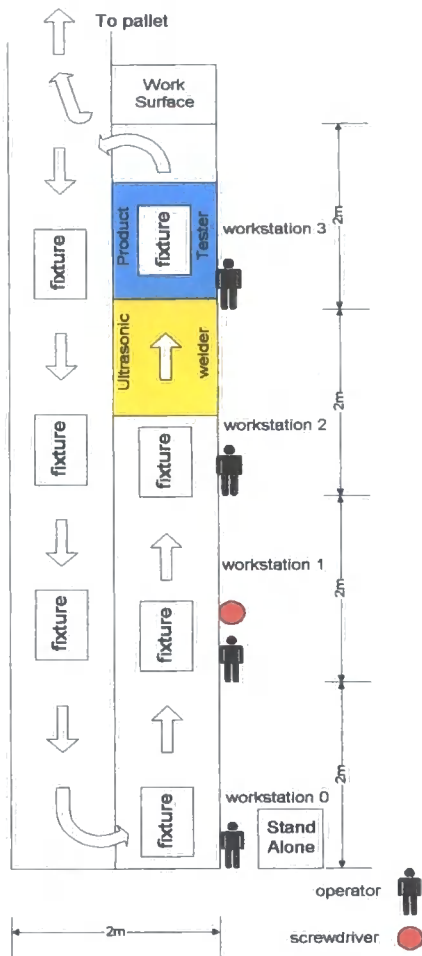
Assembly line layout for TwoShellMiniTrim_welding
